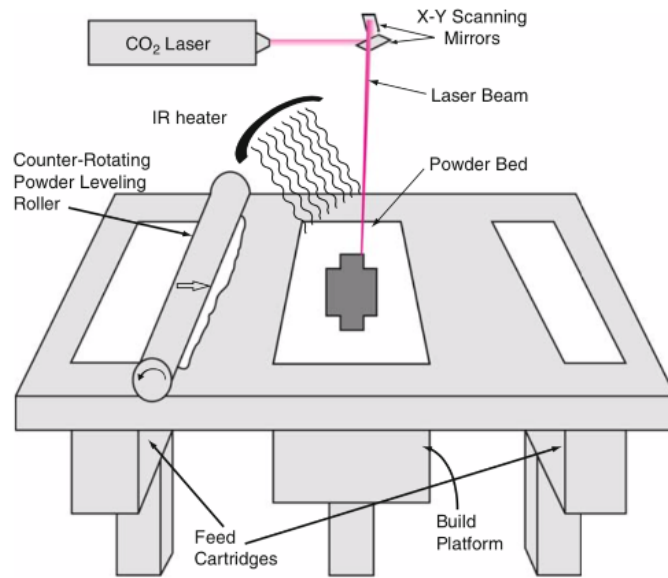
Example of sintering (SLS) machine and its process [1].
